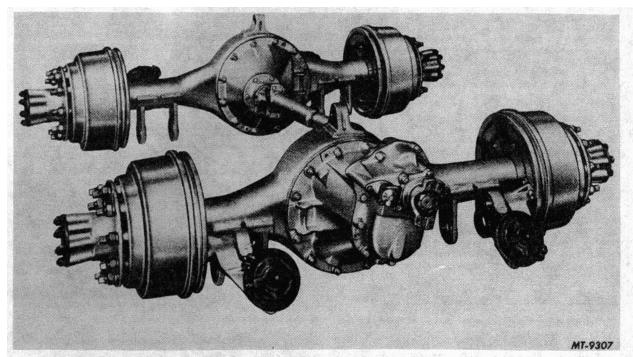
Thru-Drive Type Tandem Axle Assembly Early Production Shown Late Production Similar Except for Rectangular Axle Housing
